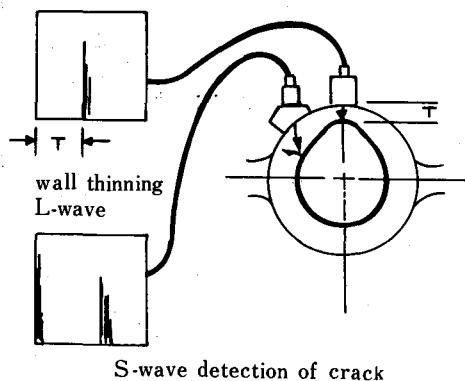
Ultrasonic testing of boiler tubes for wall thinning and inside surface cracks.
